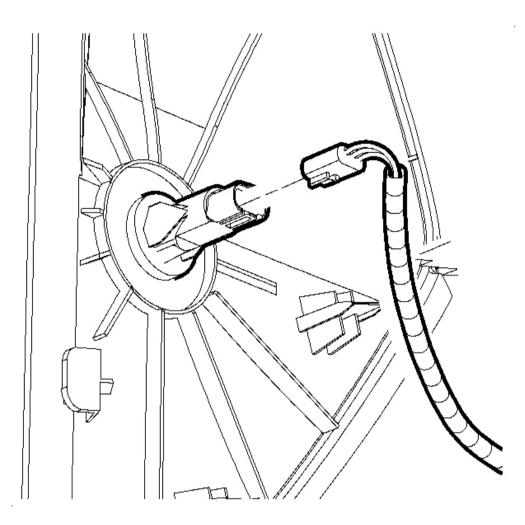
Disconnecting/Connecting Electrical Connectors Courtesy of GENERAL MOTORS CORP.
